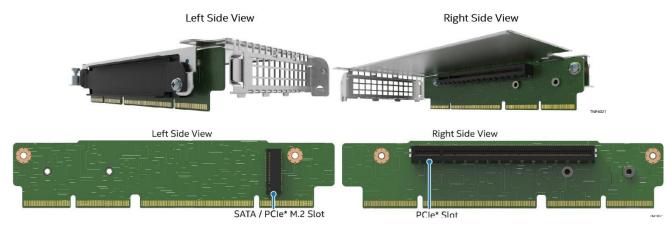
1U Riser Card Assembly (D50TNP1MHCPAC)
